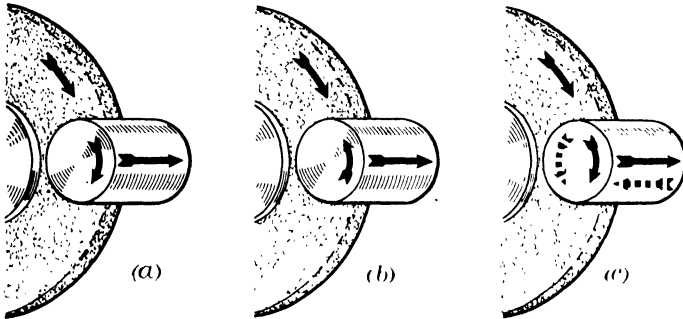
DIRECTIONS OF ROTATION AND TRAVERSE IN THREAD GRINDING
